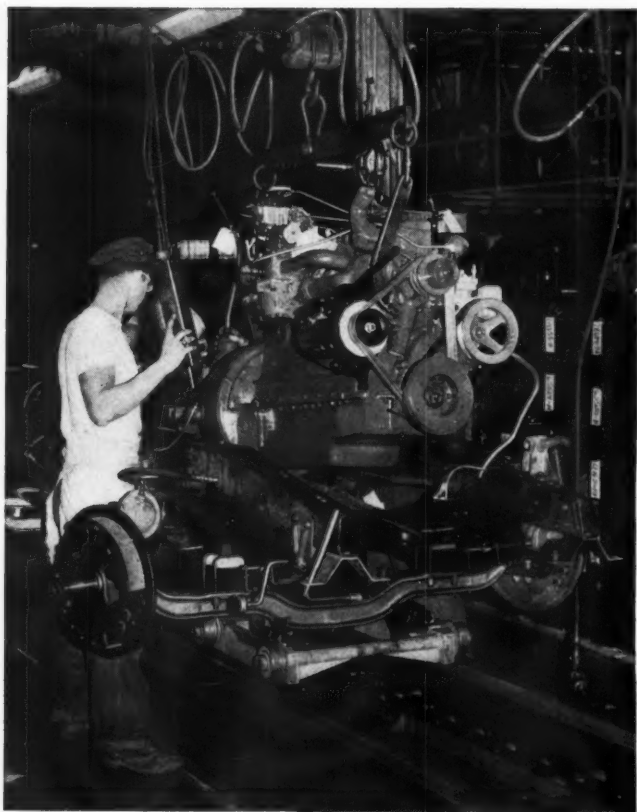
Engine mount on a box-type conveyor, featuring the "industrial rail" and dollies for support of the front and rear axle assemblies.
